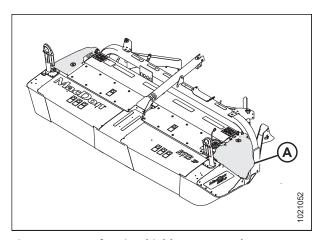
Left Driveshield – R113 SP Shown, R116 SP Similar
